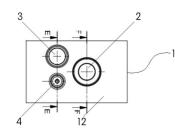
Upward view of the anti-fracture control valve casting
